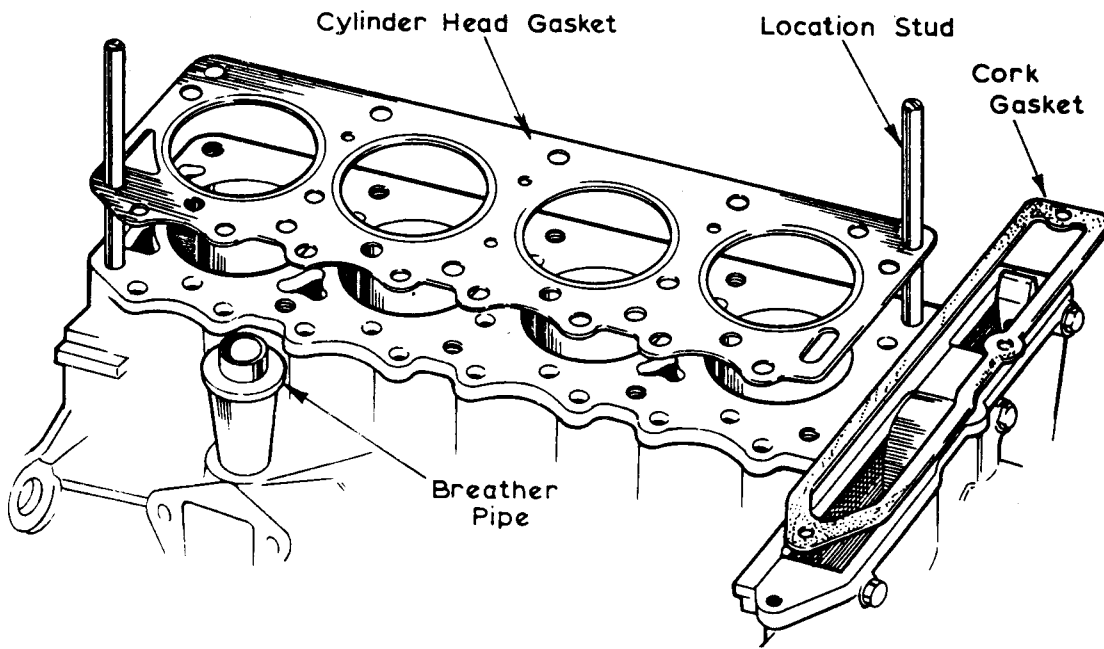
CYLINDER HEAD LOCATION STUDS & GASKETS
